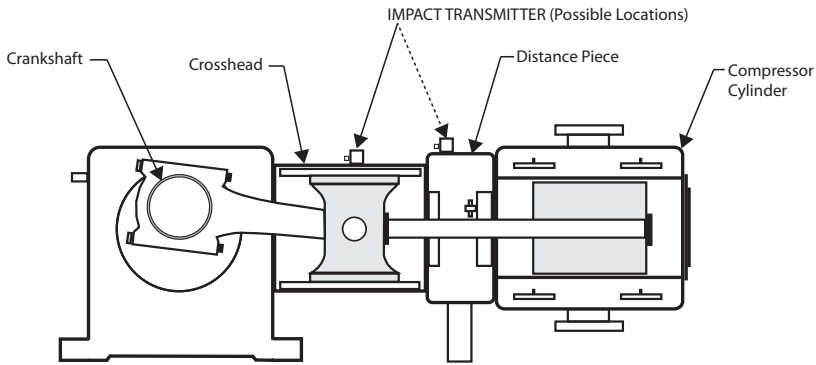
Sketch of a separable compressor cylinder showing Impact Transmitter location
